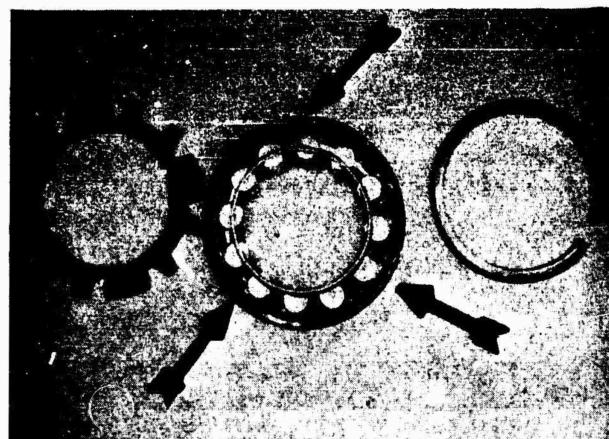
Snap-Ring Groove Broken Off Pinion-Shaft Pilot Bearing.
